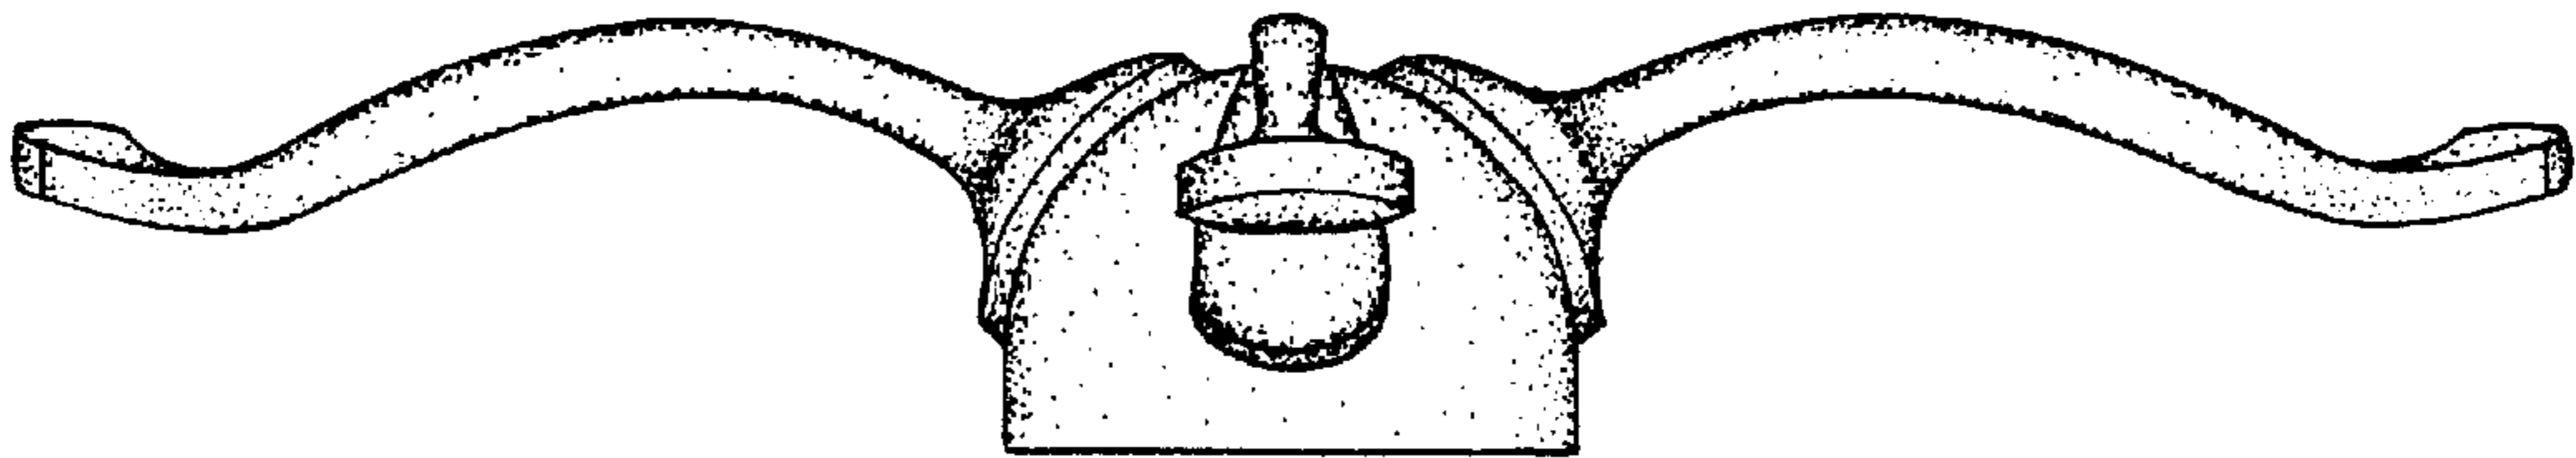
is a perspective view of a ceiling fan bottom arm assembly according to the present invention;
